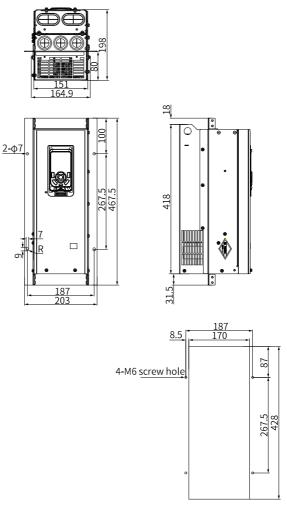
Mounting-hole dimensions (mm) of MD580-AZJ-A2T3
